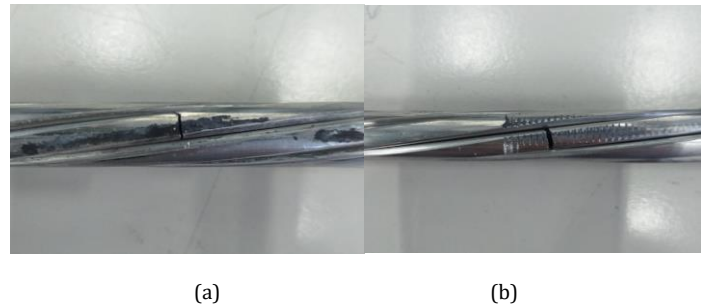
Cracked strands, a) with bolt type, b) with wedge type
